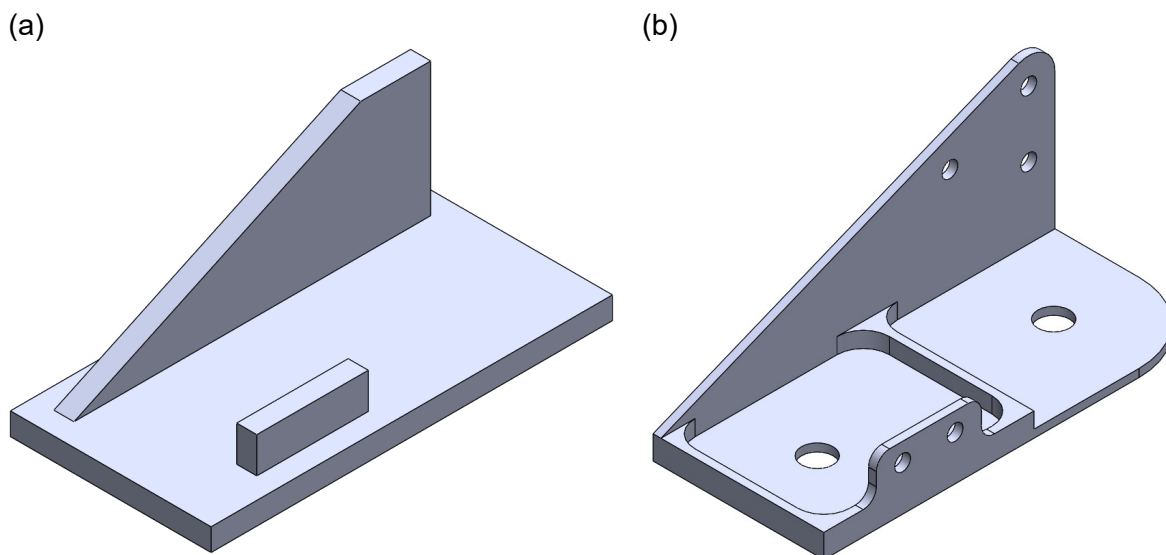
3D model of the bracket in the (a) as-built condition and (b) after final machining
